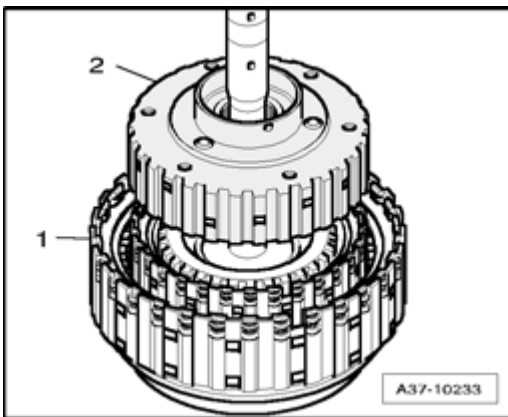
Inner Plate Carrier "B" And Clutch "A/B"
